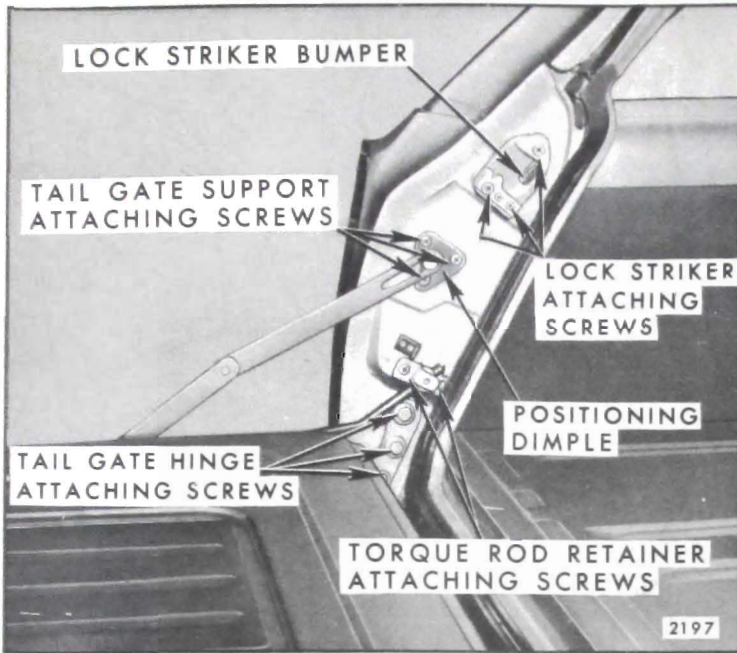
Tail Gate Torque Rod, Hinge and Support Attachments "B & A" Body Styles
